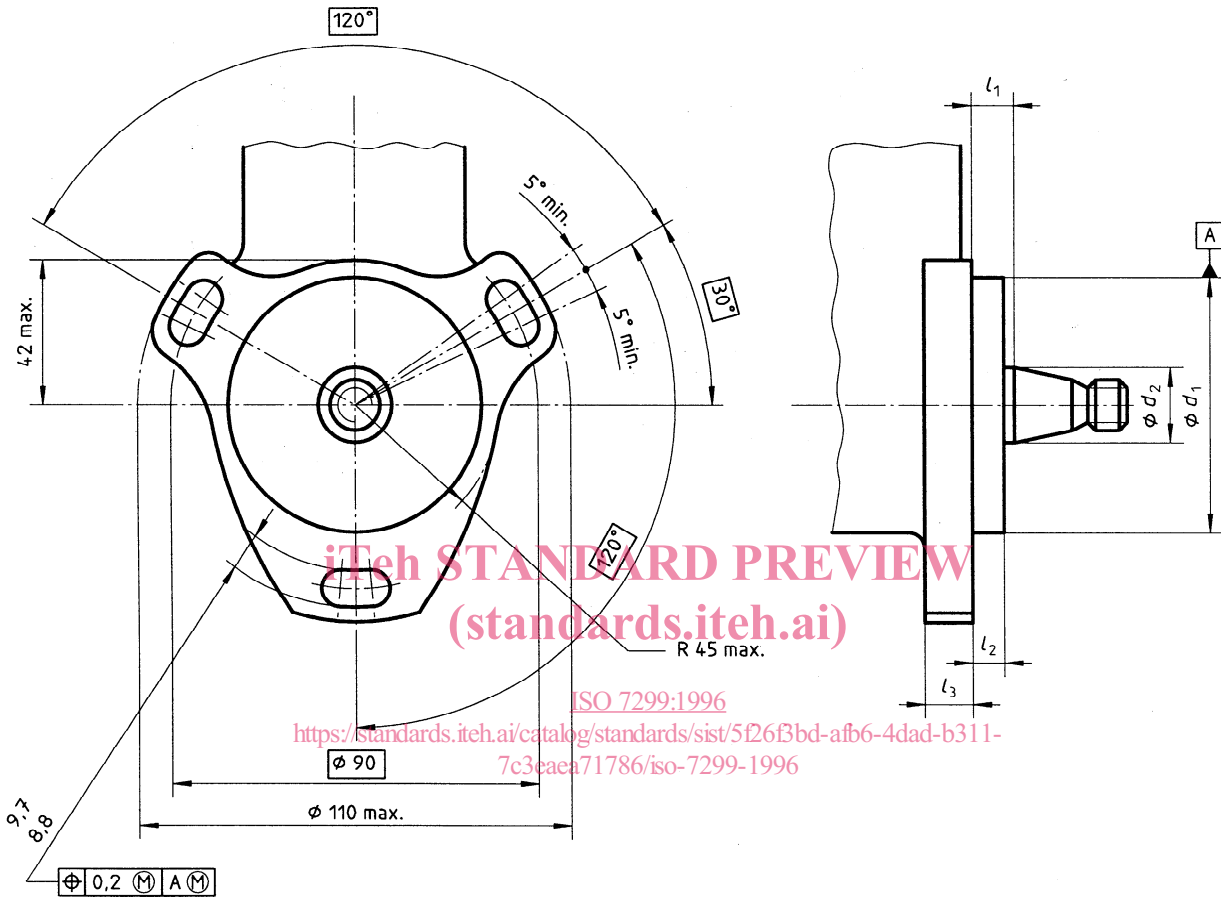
In-line fuel injection pumps — Type 4 end-mounting flange
